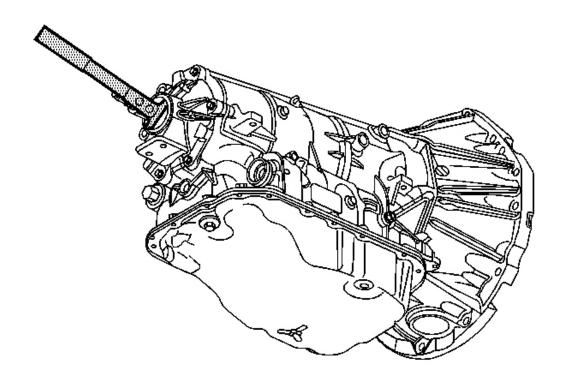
View Of J 45000 Courtesy of GENERAL MOTORS CORP.
